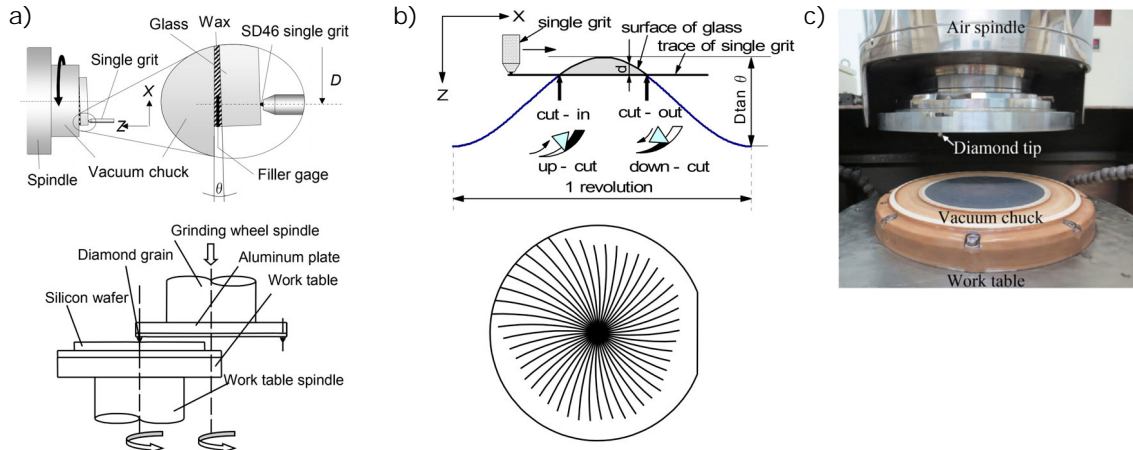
(a)-top: Inclined scratching setup [202]. (a)-bottom: Trace of the grain tip on workpiece. (b)-top: Rotating tool-workpiece scratch test setup [93]. (b)-bottom: Grooves on workpiece surface. (c) Rotational scratching of silicon wafer [246].
